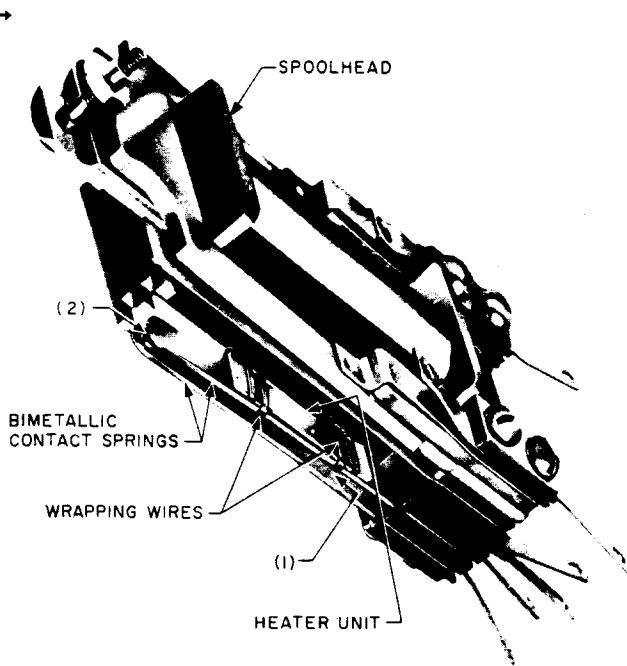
Type Relay — Bottom View Showing Thermal Unit
